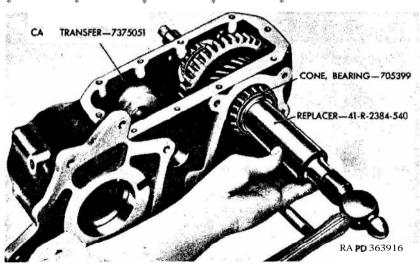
(Superseded) Installing transfer rear axle output shaft inner bearing cone.
